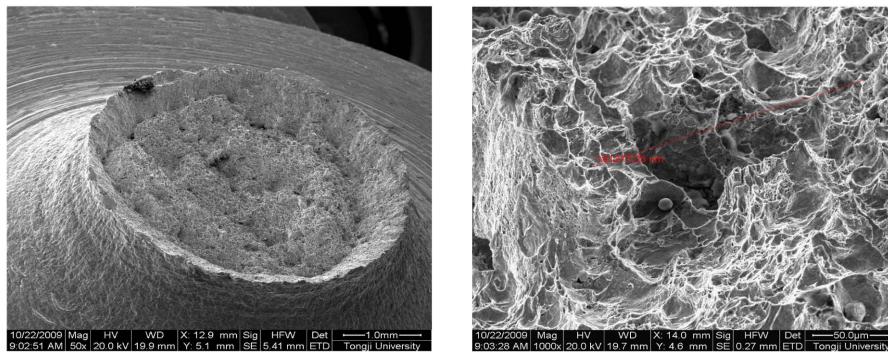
Typical fracture surfaces of specimen 4-1
